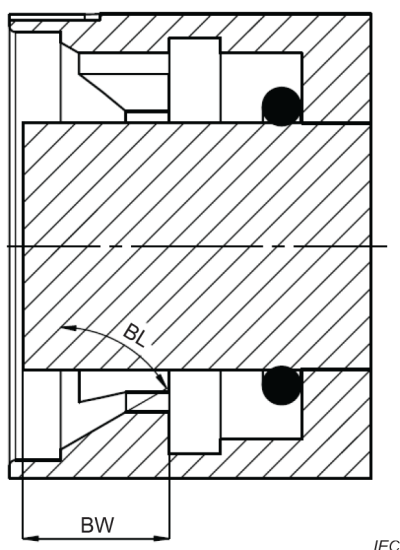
Side view of the female side of the push-pull housing for Type 4
